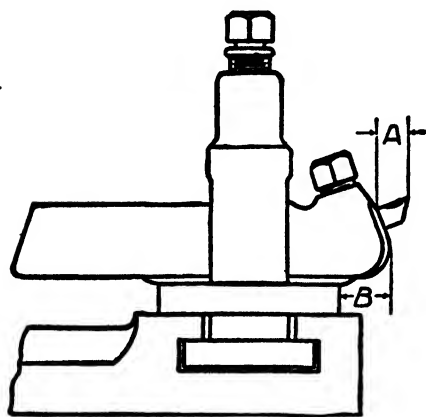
Mount the cutting tool in the toolholder, and the holder in the tool post, so as to give a minimum of overhang. Keep dimensions A and B small. (South Bend Lathe Works)
